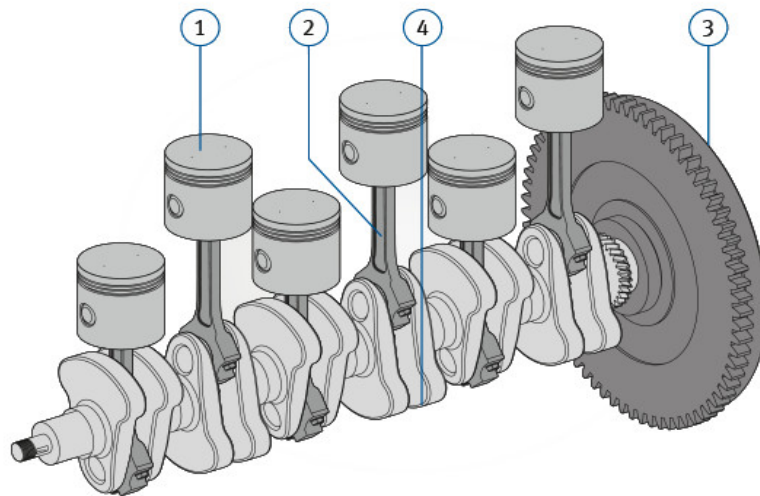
1. Piston 2. Connecting rod 3. Flywheel 4. Crankshaft balance masses
